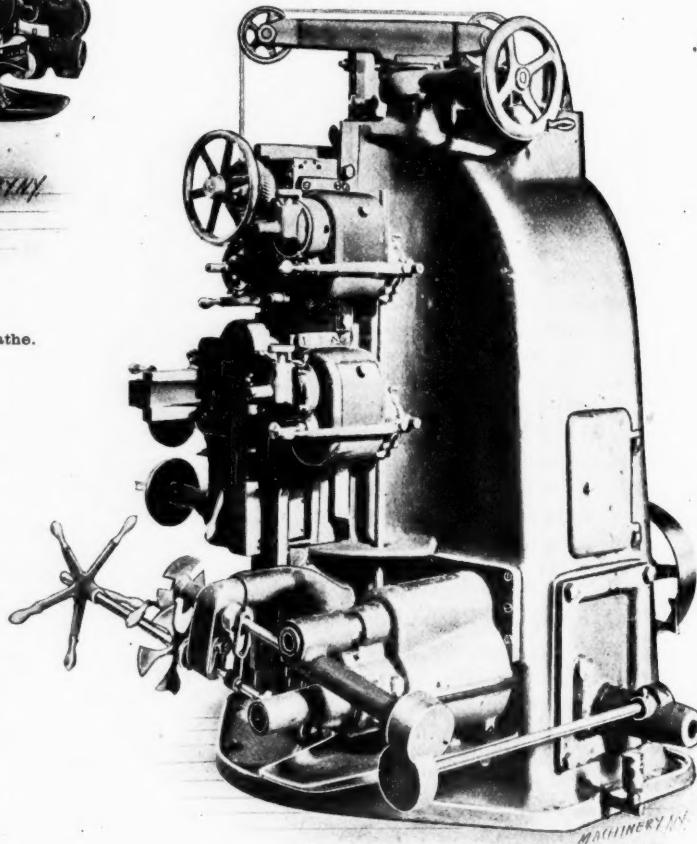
The Driving and Feed Mechanism of the Bullard Turret Lathe.
